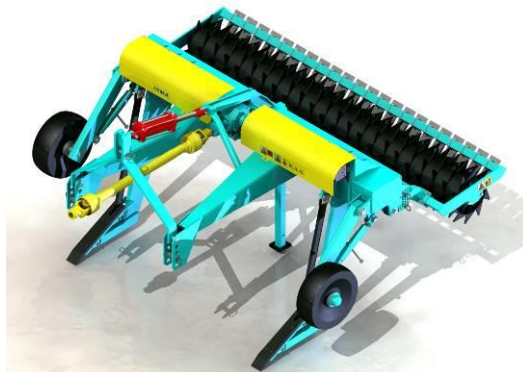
Technical equipment with active parts driven for deeply loosening the soil /
